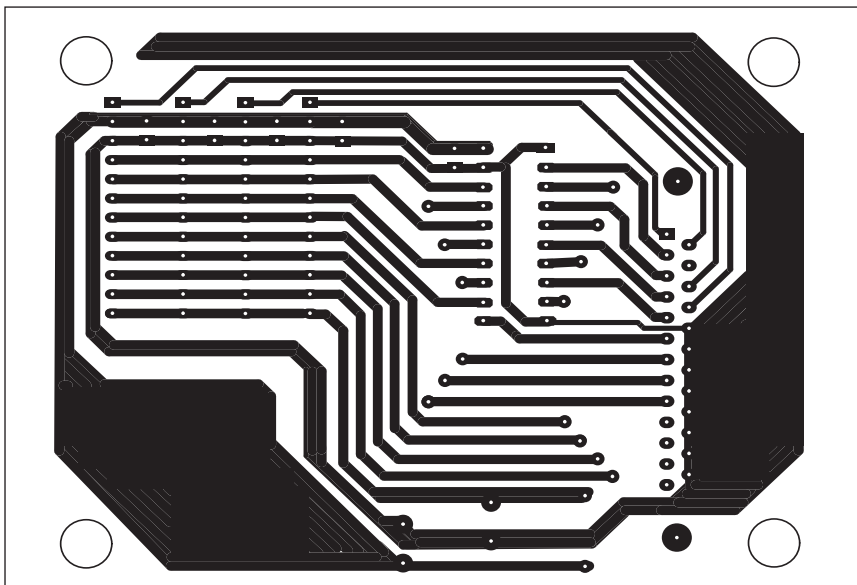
Actual-size, single-side PCB-1 layout for relay card circuit
